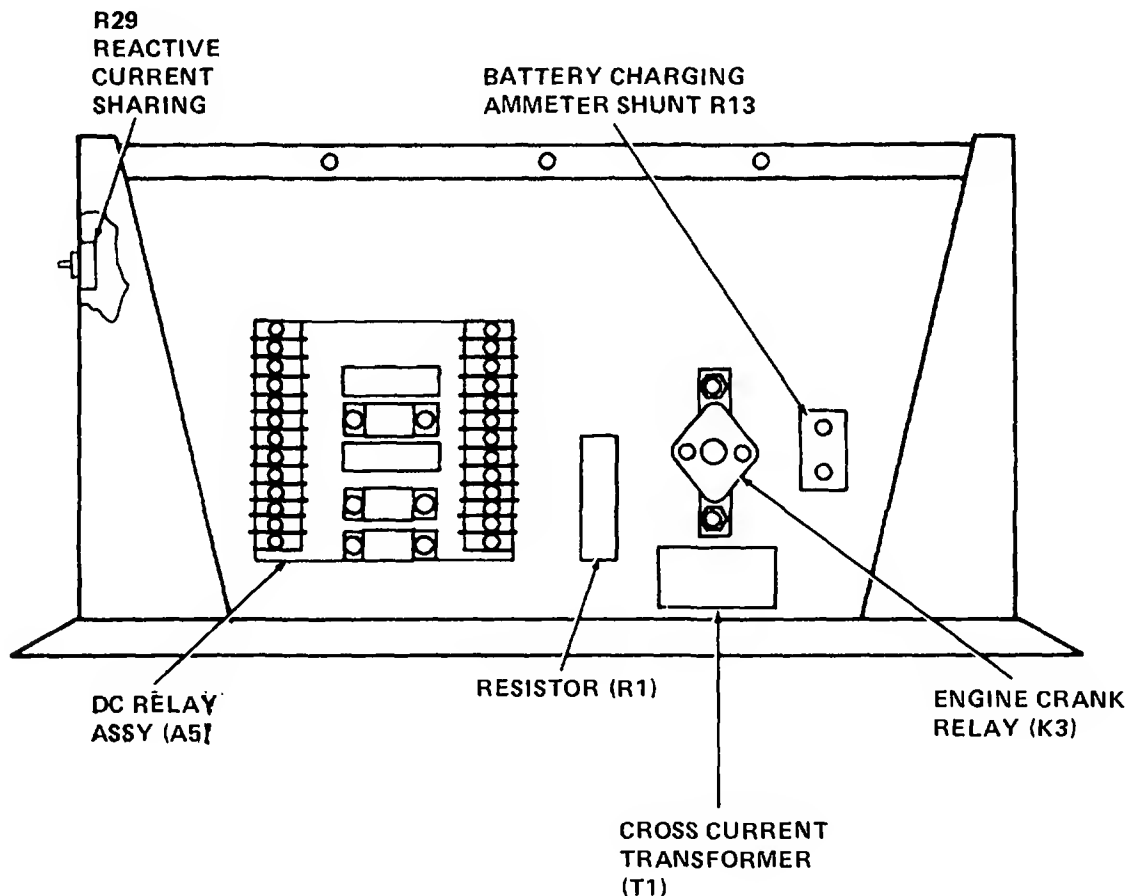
Mode I Relay Box Assembly A27, Cover Removed
